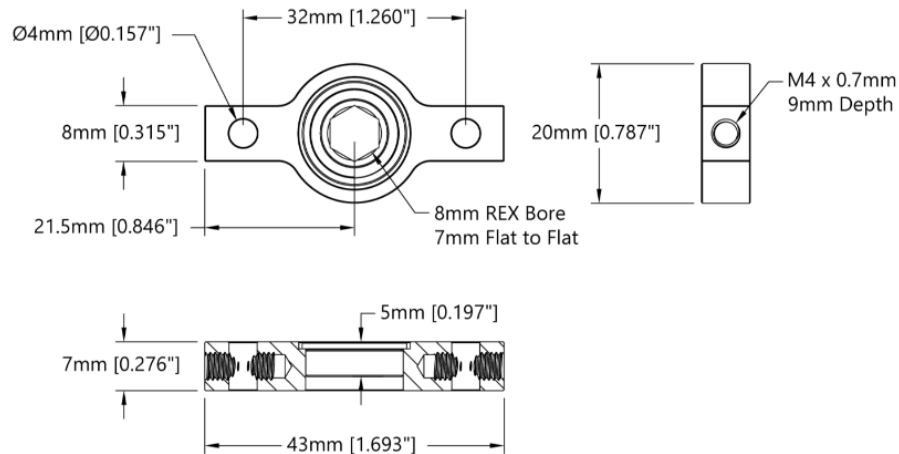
Central hex bore bearing drawing (mm). [12]
